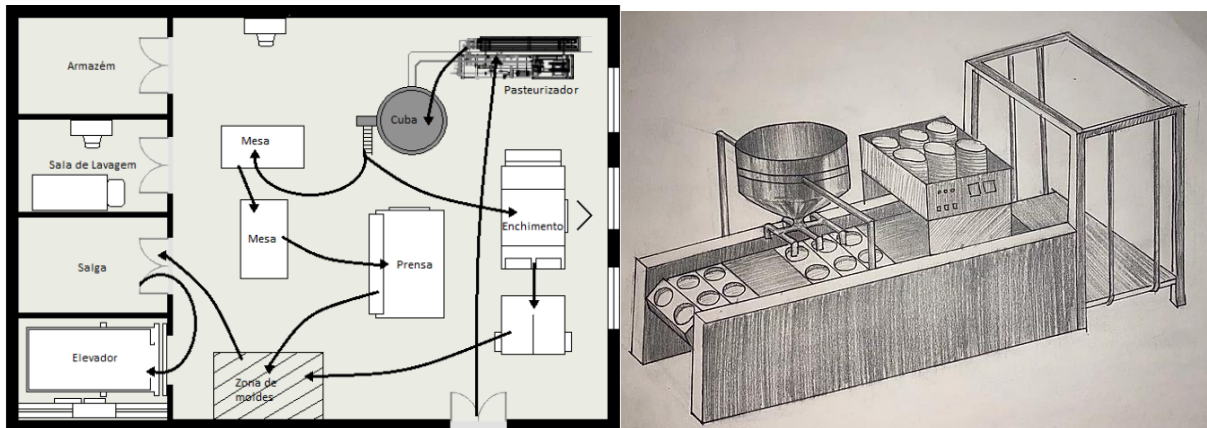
One team project outcome: Cheese production, layout and filling machine draft.
